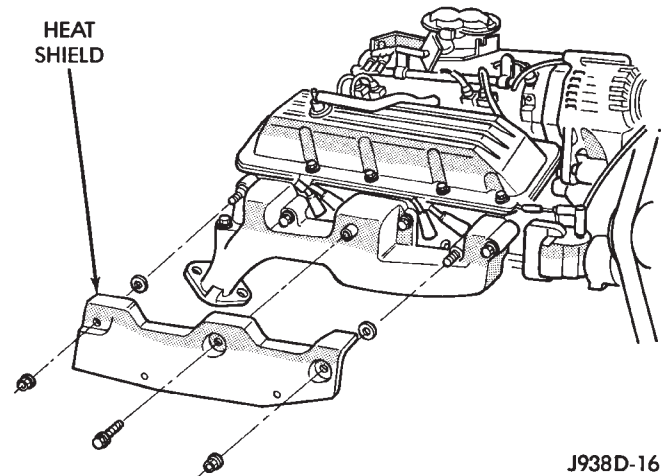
Exhaust Manifold Heat Shield—5.2L Engine
